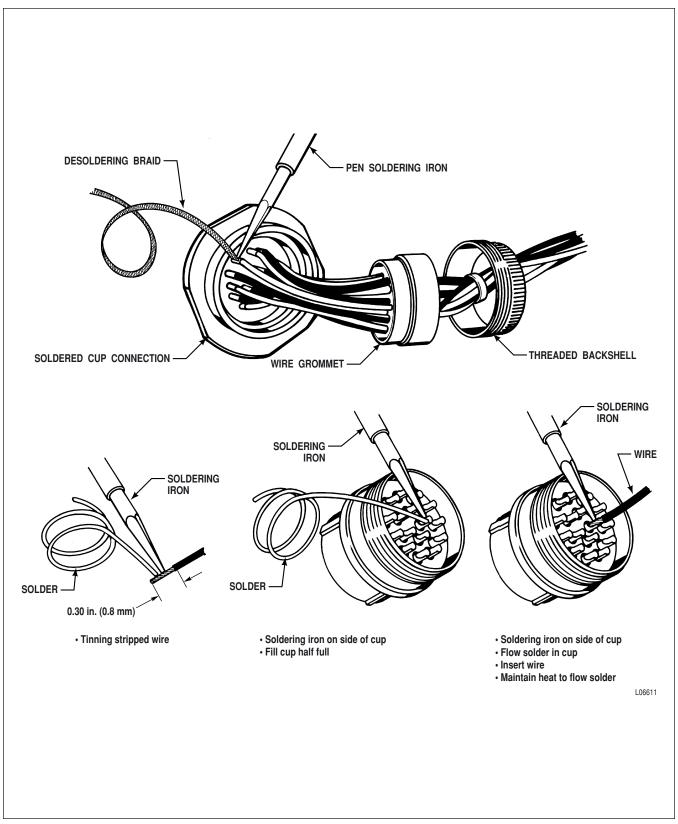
ITT Cannon Connectors—Soldered (Main Valve Body Internal Harness, Main Valve Body Harness, Lockup Body Harness, Trim Boost or Low Body Harness)
